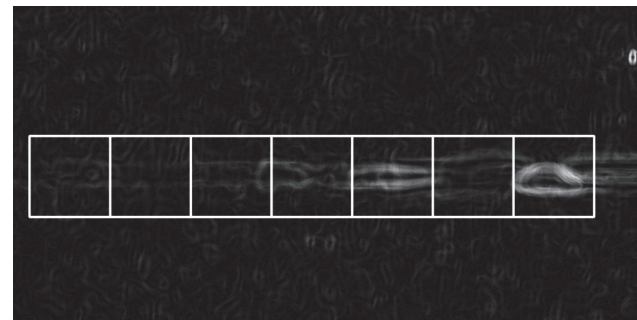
ROI from a butt joint laser weld X-ray image
